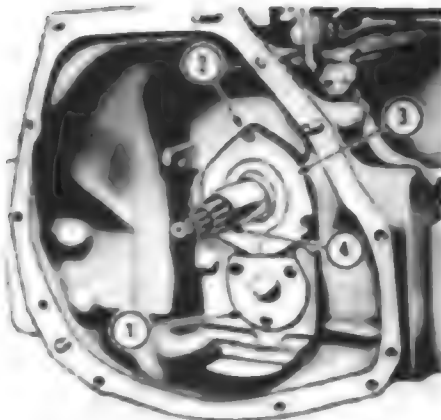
Front view of clutch housing with release bearing, fork and shaft removed.
